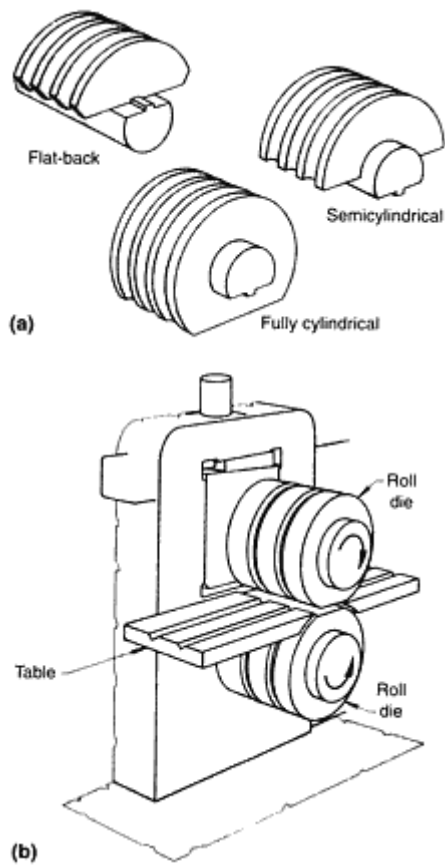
(a) Dies used in roll forging. (b) Overhang-type roll forger that utilizes fully cylindrical dies
